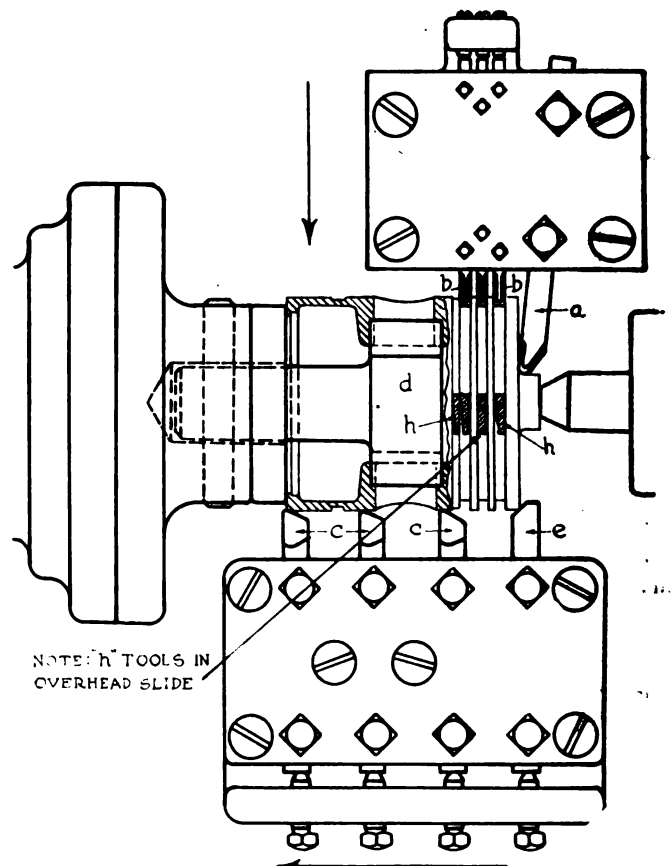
Finish-turning, grooving and facing a piston in a Fay lathe
